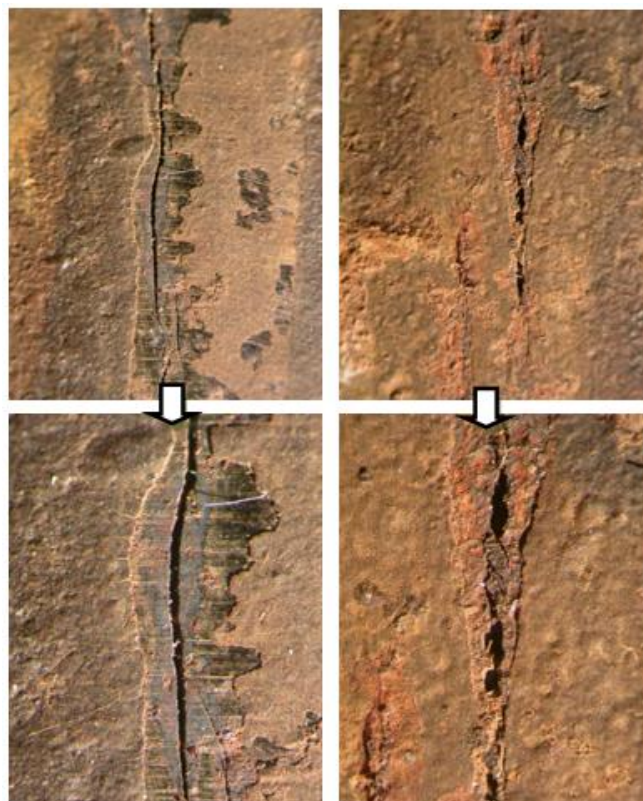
Macroscopic view of some longitudinal cracks area obtained from the external surface of the tube shown in Figure 2
